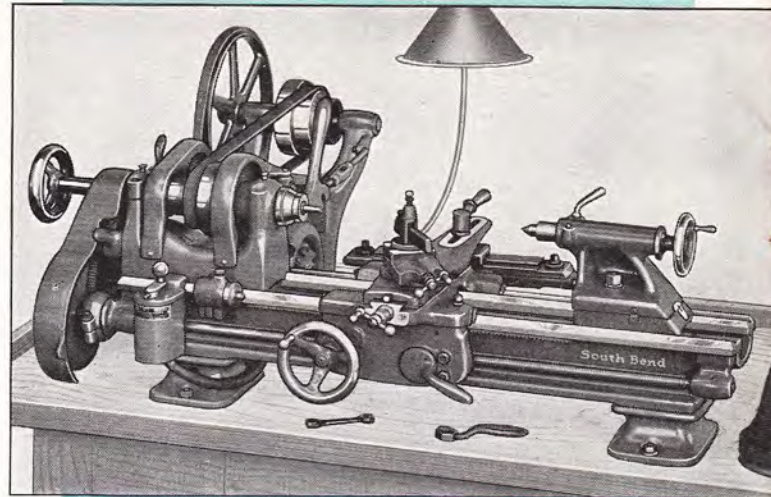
Cat. No. 8415-YA, 9"x3' "Workshop" Precision Bench Lathe with Adjustable Horizontal Motor Drive, complete as shown, but less bench\$233.50
